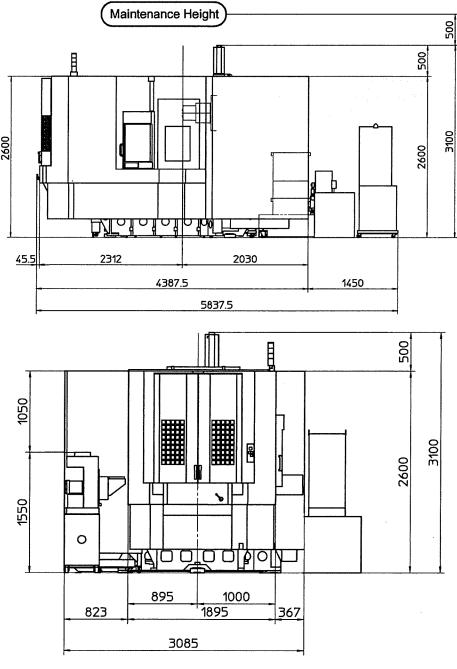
Front and Side View of Machine (Tool Magazine A40 and Left Discharge Lift-Up Conveyor Spec.)
